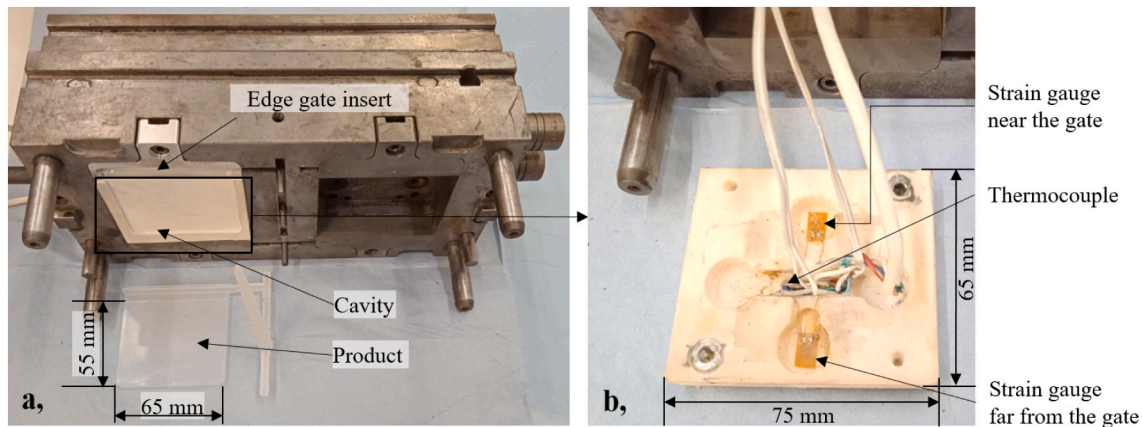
The complete test mould and the injection moulded product a), the moving side insert with the strain gauges and the thermocouple b).
